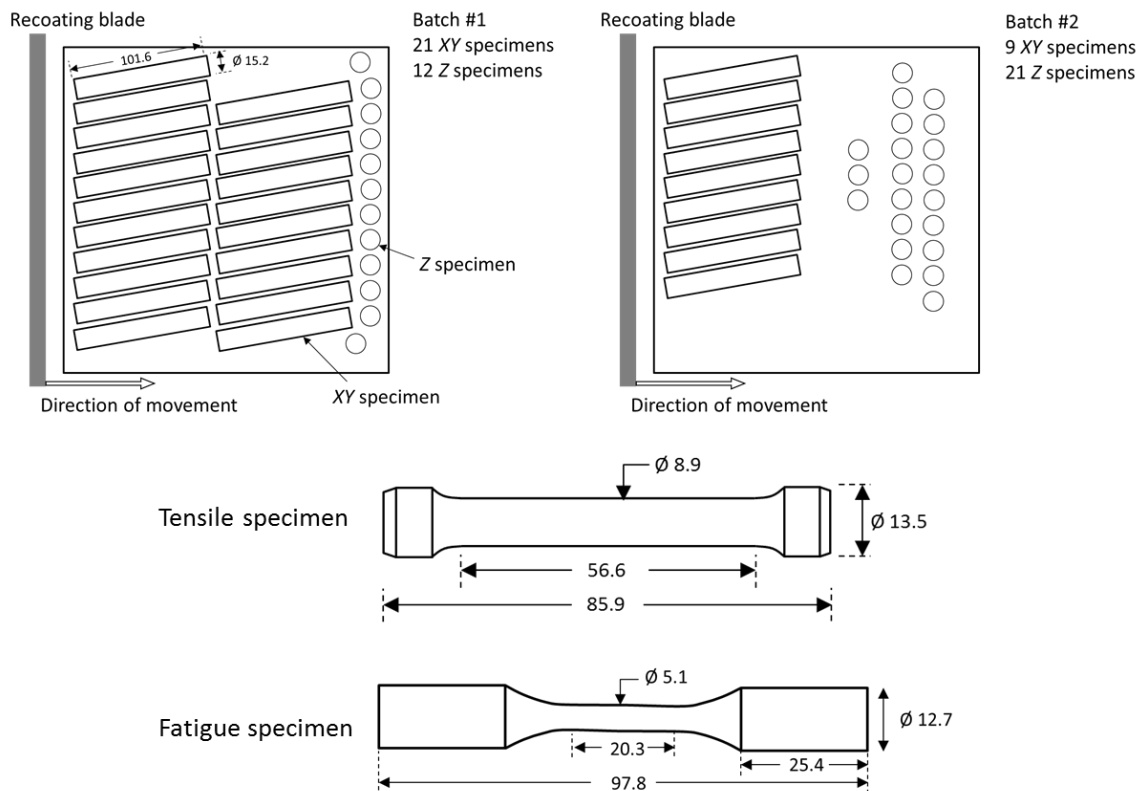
The layout of cylinders during building (two images at the top; plan view) and dimensions of tensile samples and fatigue samples (bottom) machined from as-built cylinders.
